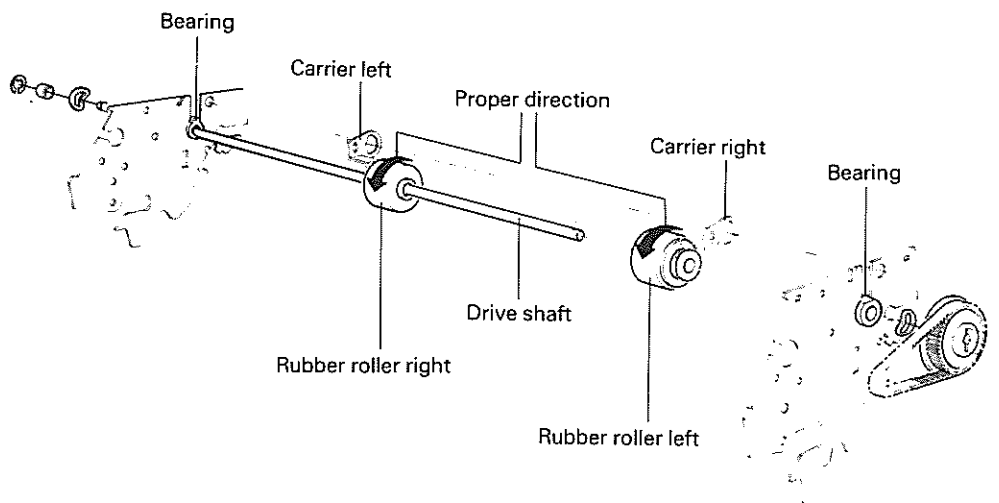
Drive Shaft and Rubber Rolls Removal (B)
